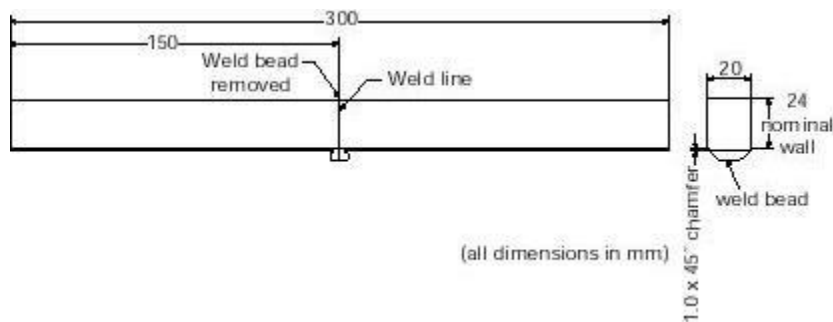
Typical geometry and dimensions of bend test specimen, as defined in EN 12814-1
